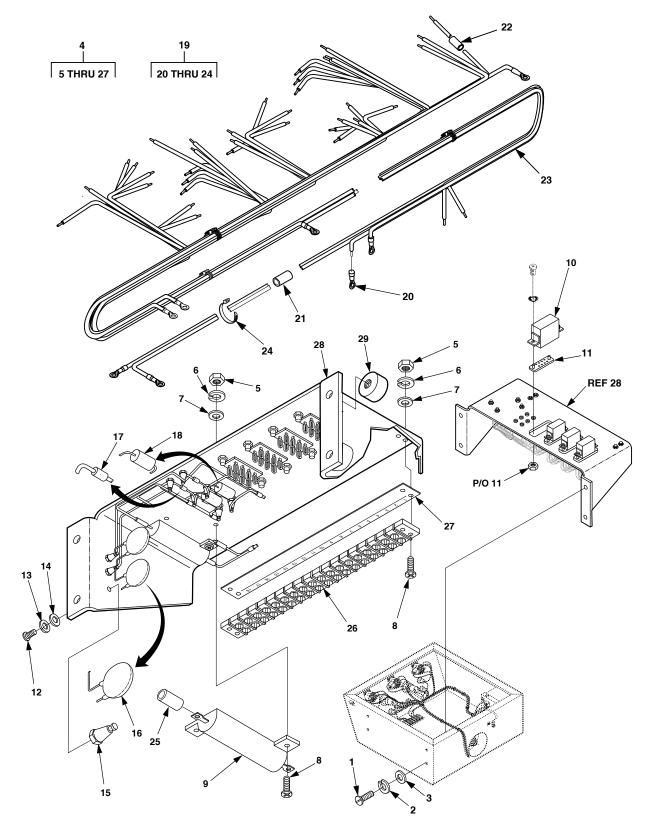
Relay Board Harness Assembly (Sheet 1 of 2).
